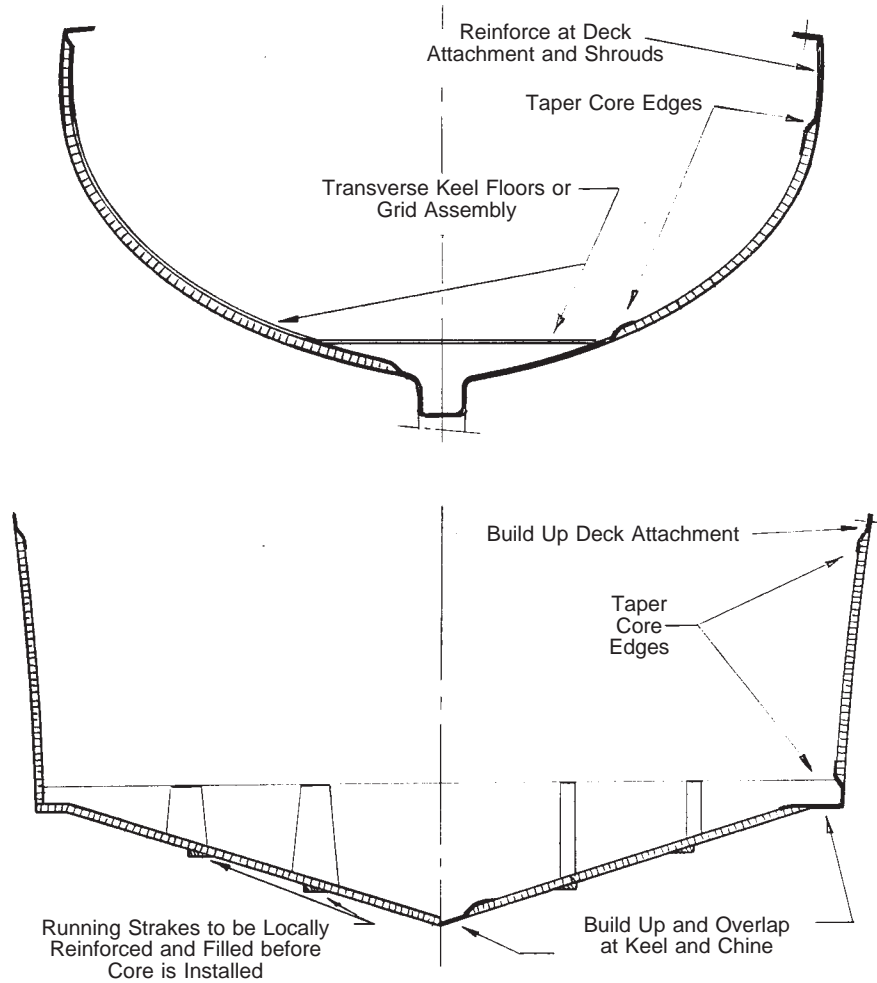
Typical Sail and Power Cored Construction Midship Section [Walton, Baltek]
